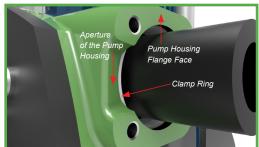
Dura 15, 25 and 35 clamp ring inserted
